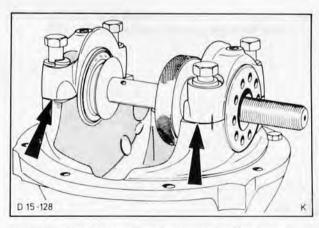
Fit bearing caps ensuring correct location (arrow)
